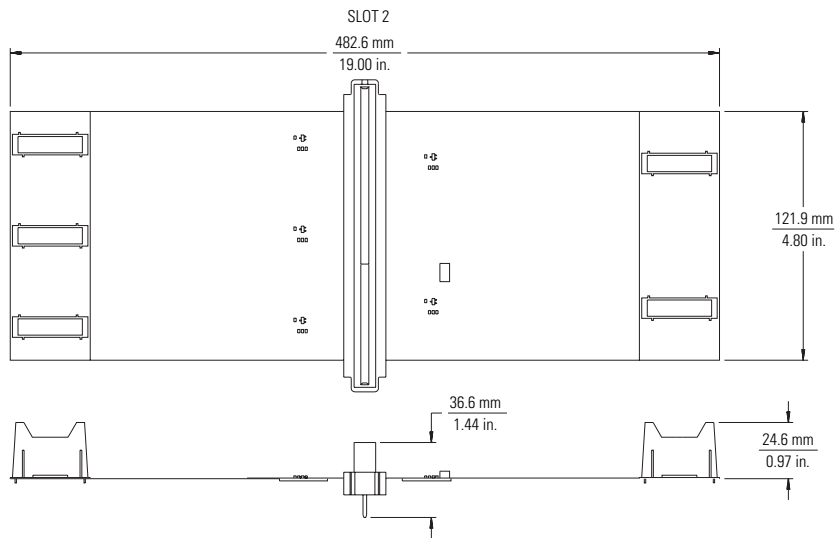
E2492C SC 330 (Slot 2) Probe Adapter Mechanical Dimensions
